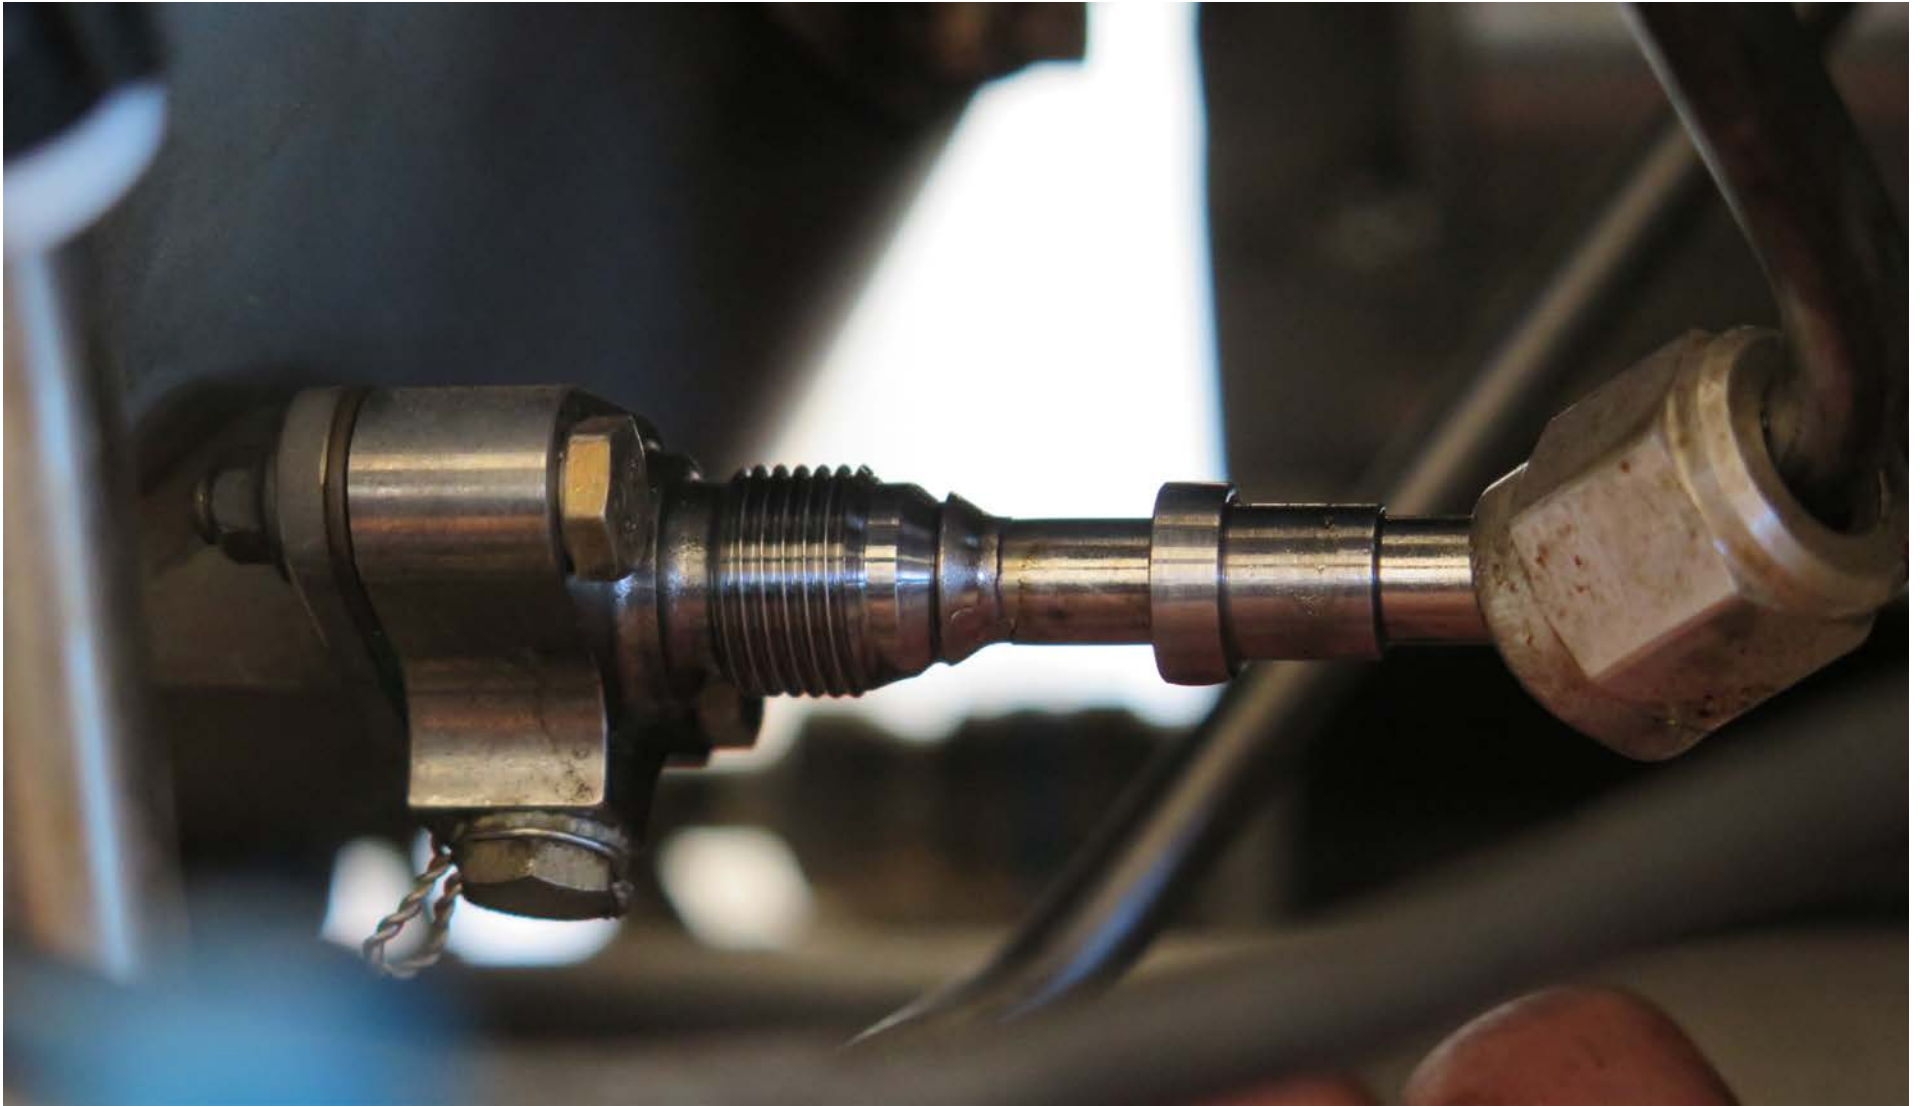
Fuel pipe shown after the b-nut had been backed off by investigators, showing cracked fuel pipe flared end.
